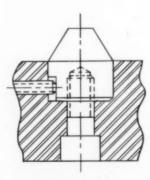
Core tapped and retained by socket head cap screw. Addition of dowel pin or key would prevent rotation when installing or removing core.
